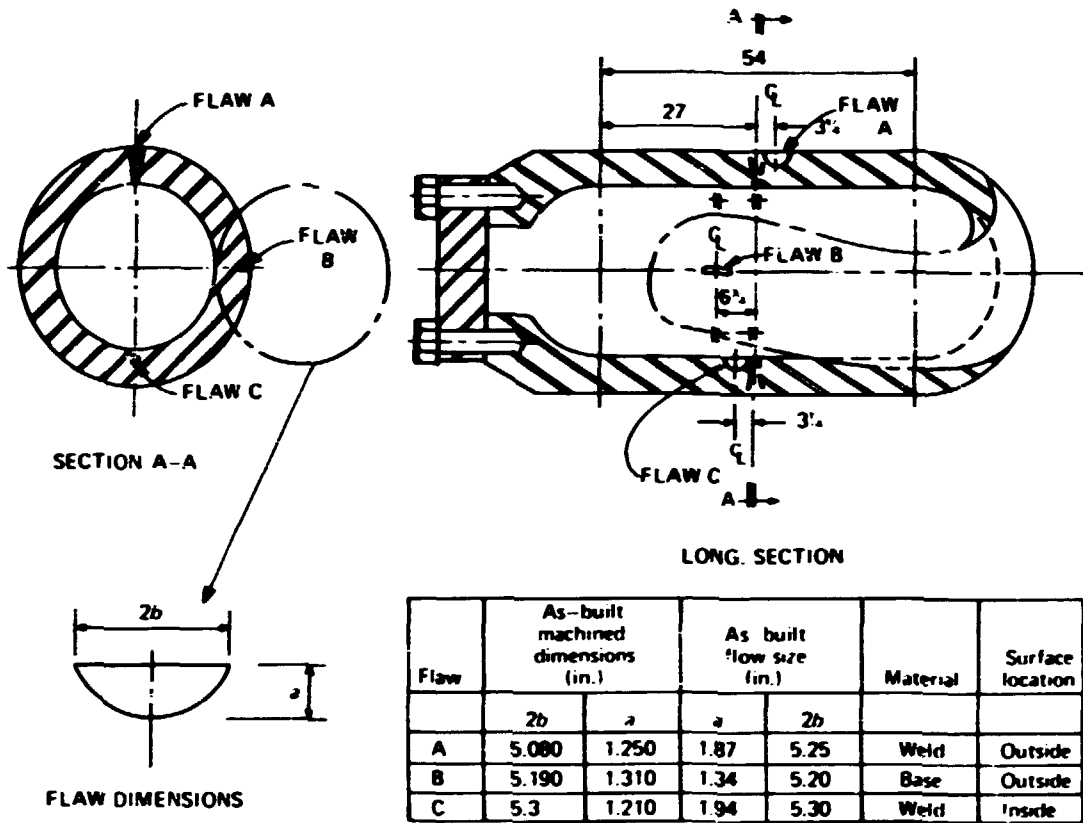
Sketch showing flaw locations and as-built flaw size for intermediate test vessel V-6.
